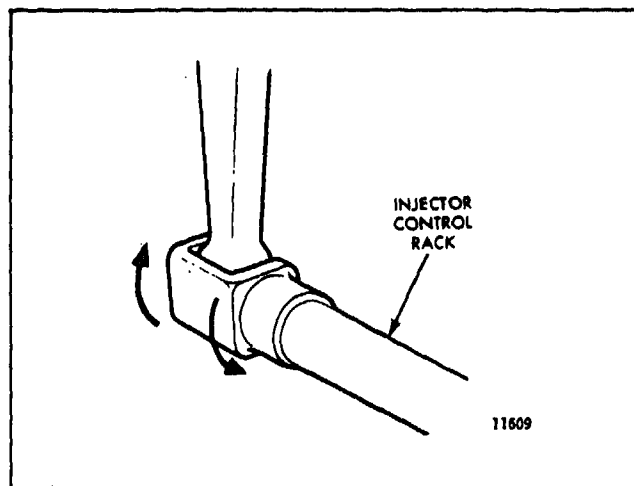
Checking Rotating Movement of Injector Control Rack
